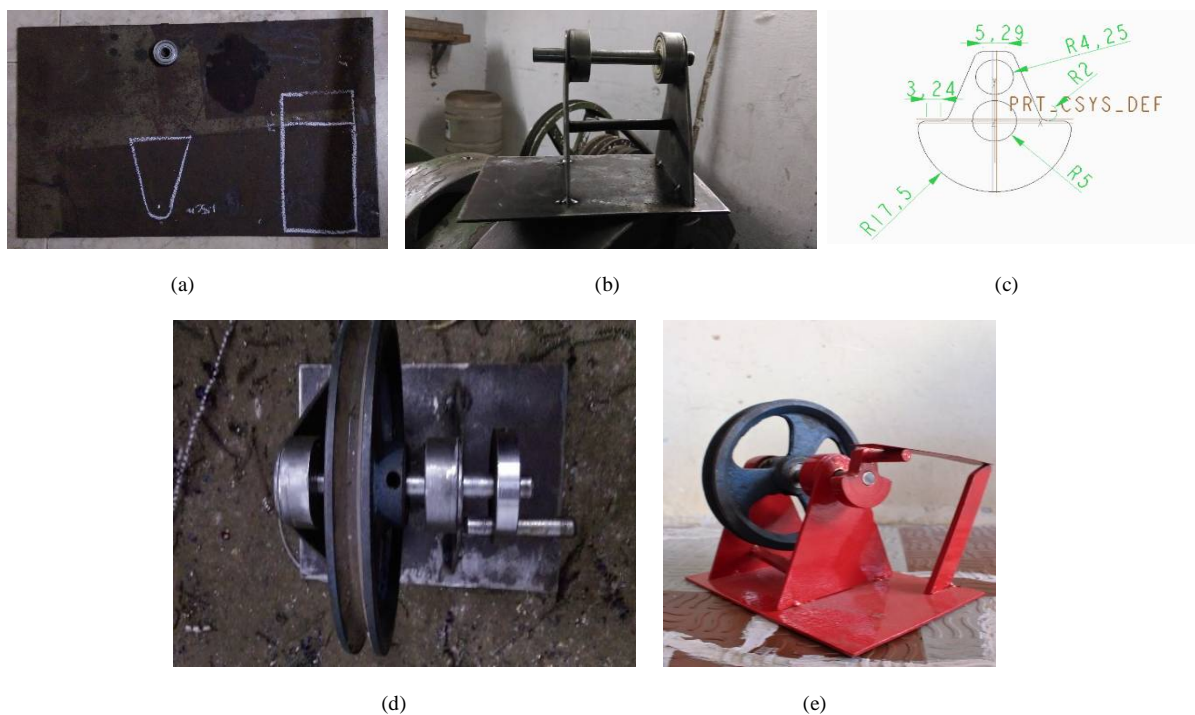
Construction (a) Sheet metal (b) Setup after welding (c) Balancing weight (d) Entire setup (e) Photographic view
